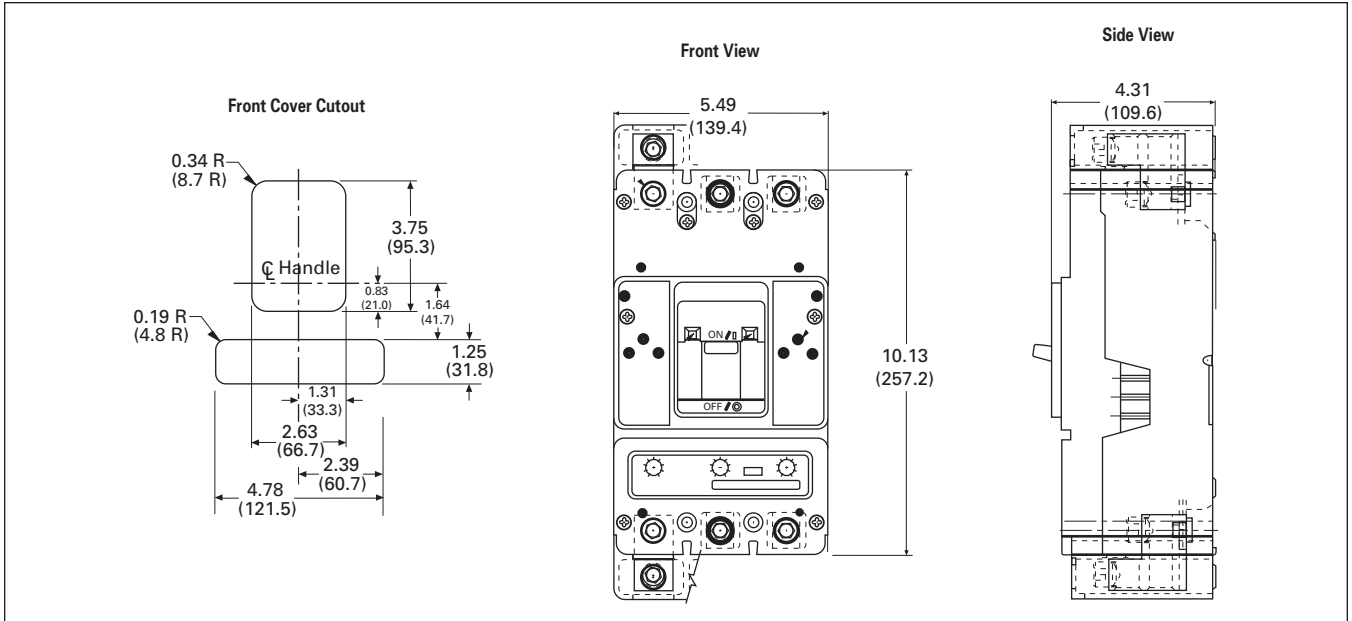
KD-Frame, 2- and 3-Pole — Dimensions in Inches (mm)
